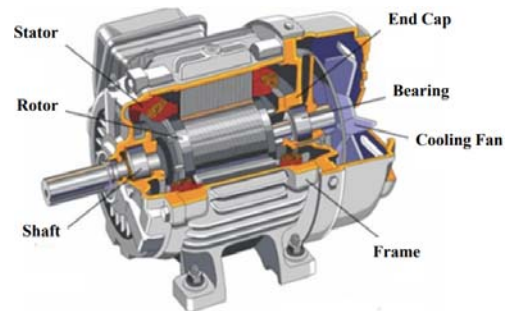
Cutaway view of a three-phase squirrel-cage motor.
